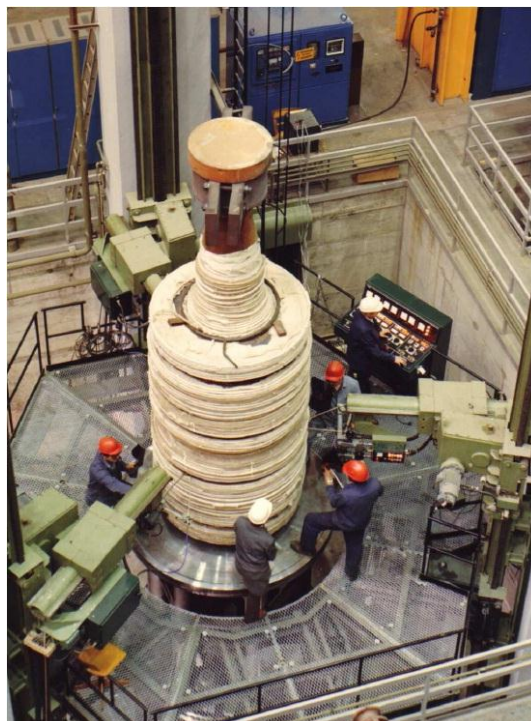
Vertical welding stand [Deuma 2010, p.4]
